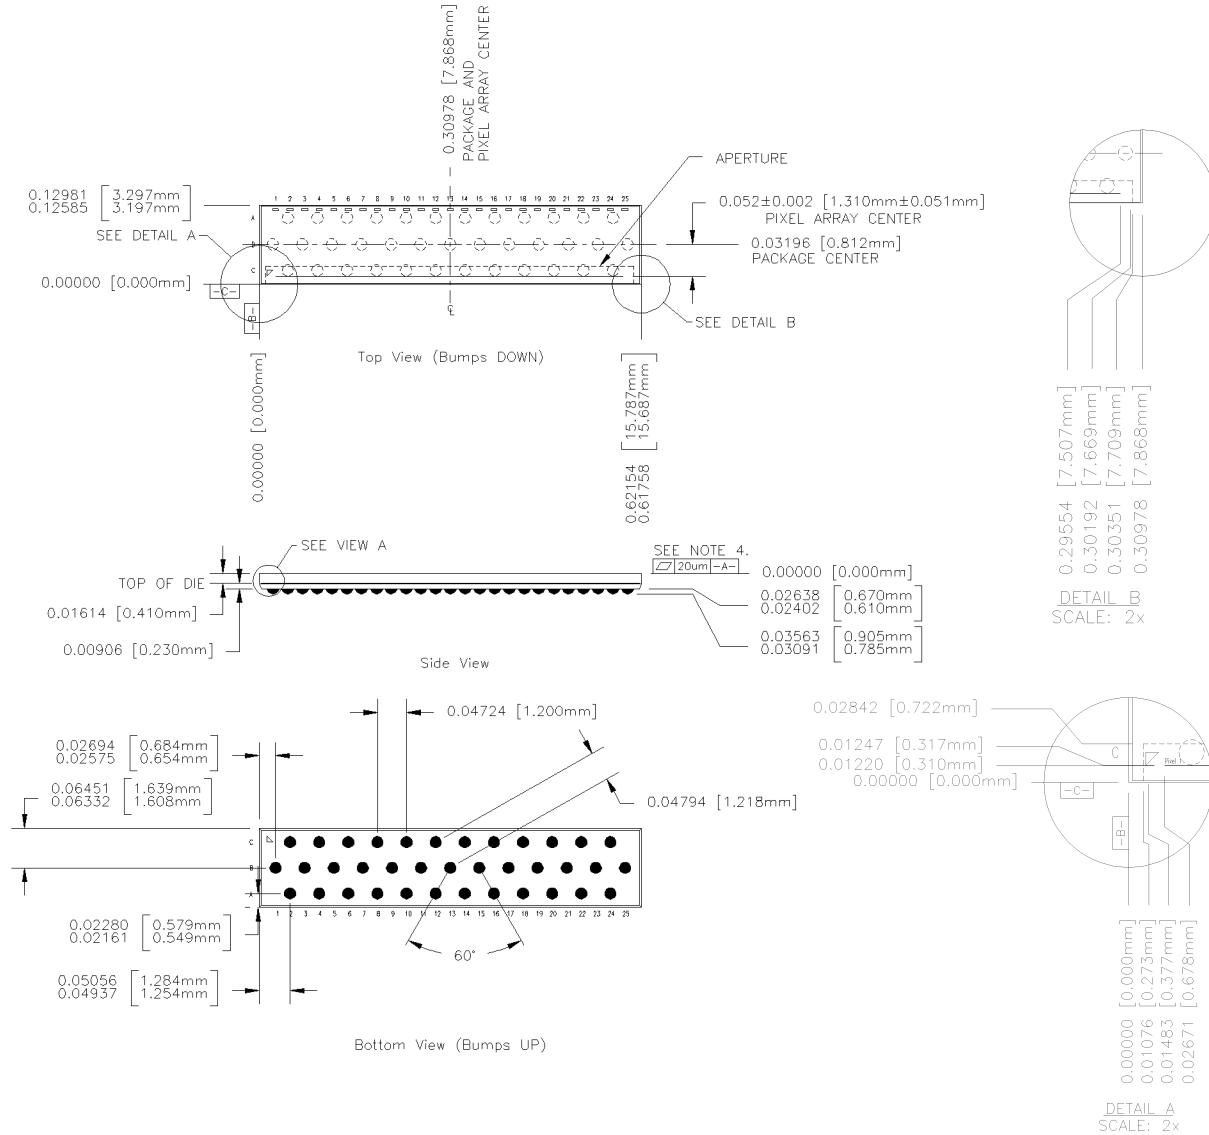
Outline, Chip Scale Package (Preliminary Dimensions)
